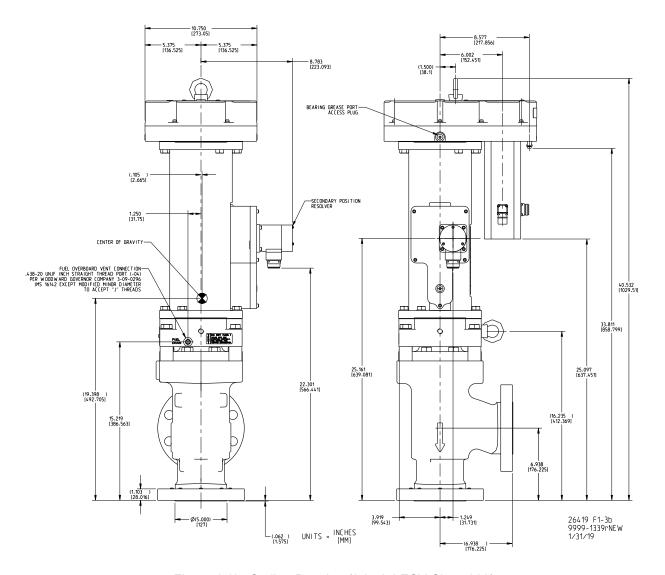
Outline Drawing (3-Inch LESV Class 300)
